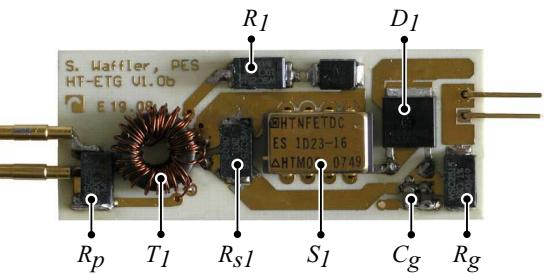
Prototype PCB of the 200°C Edge-Triggered Driver
